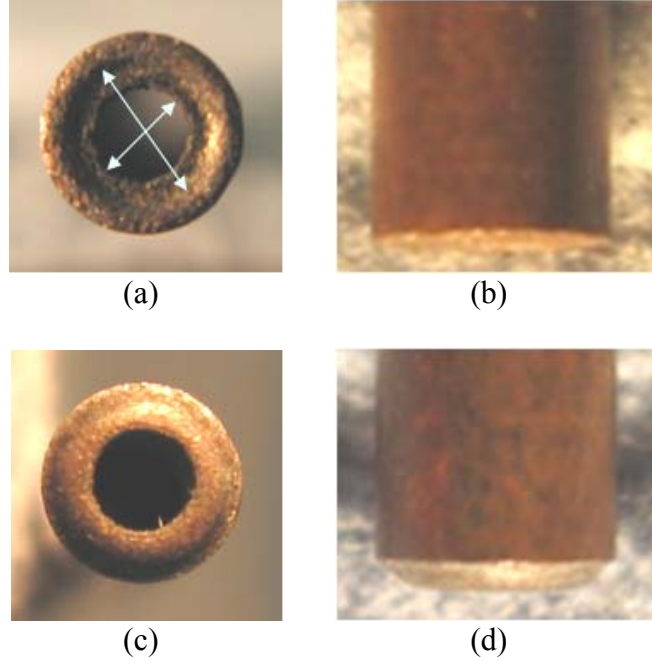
Picture of a tip of a worn electrode after machining (a) with α , front view (b) with α , side view, (c) without α , front view, and (d) without α , side view.
